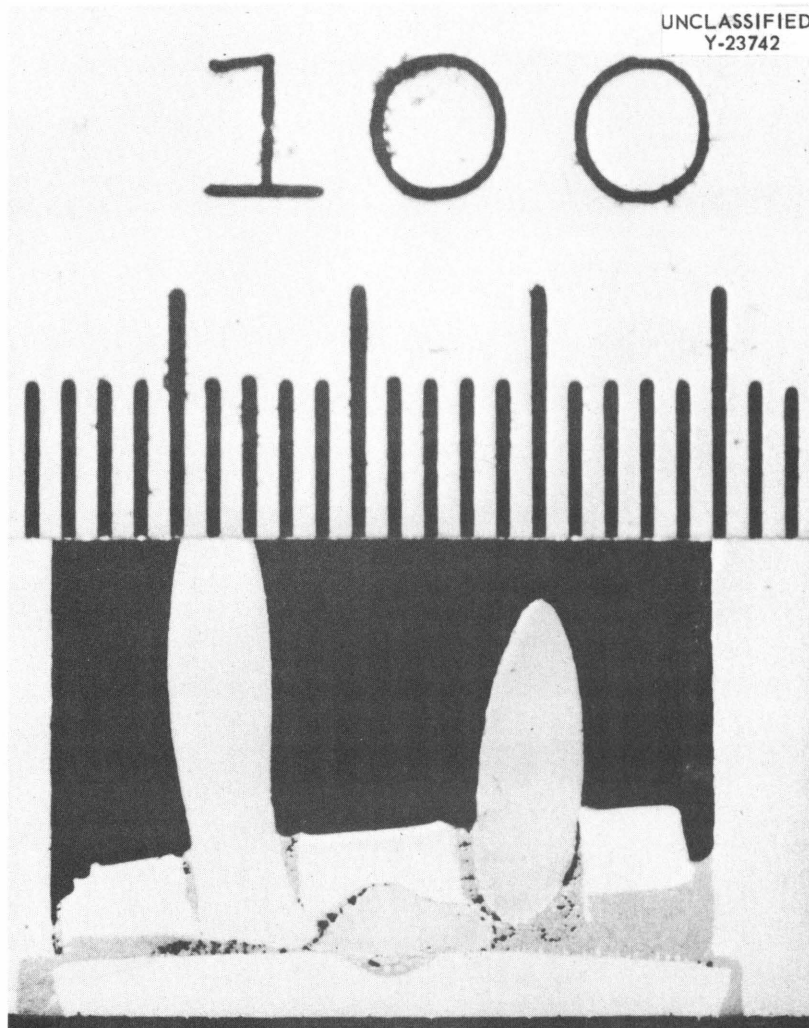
<sup>(8)</sup>. Cross-Section of CM 52 Brazed Closure for 0.250-in.-O.D. Inconel-Sheathed Thermocouple Showing Cover, Brazing Alloy, Four-Hole Cap, Two of Four Wires, Magnesium Oxide. (Note lack of void space and porosities around the wires.)
